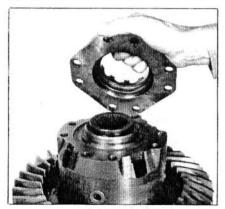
Differential Lock Coupler Cap Removal or Installation
